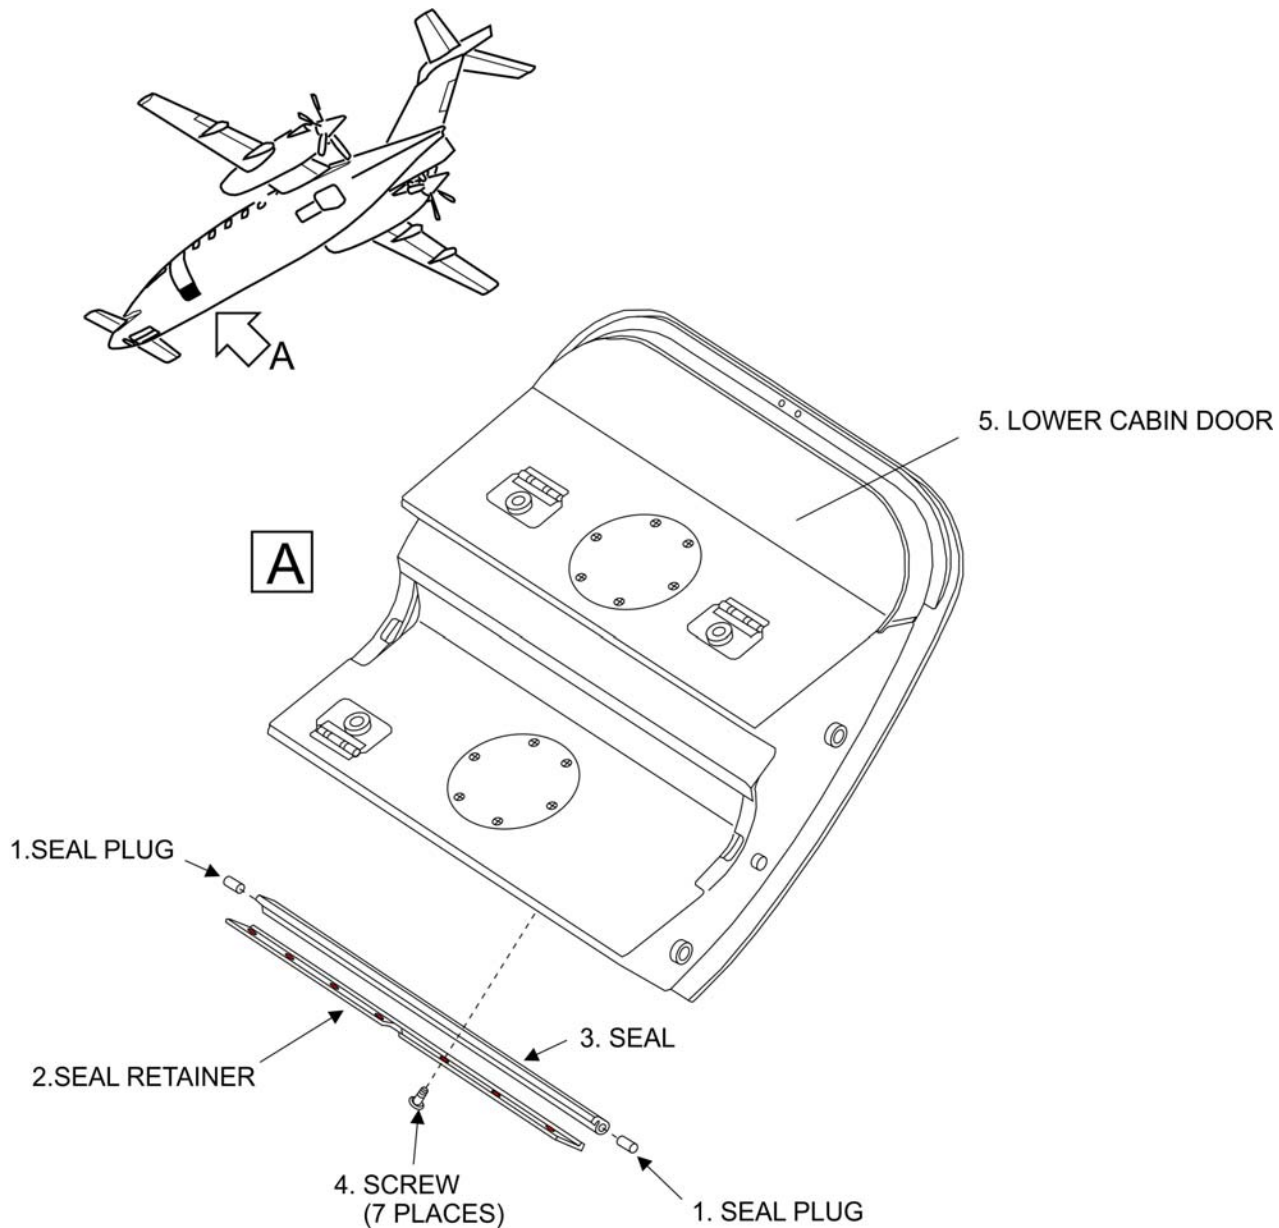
Cabin Lower Door Seal - Removal / Installation (Sheet 1 of 3)
